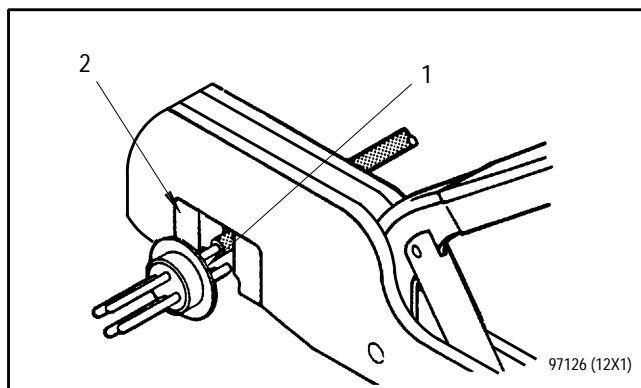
Installation of Lead Wires Into Insulator Assembly (Sheet 4 of 6)
